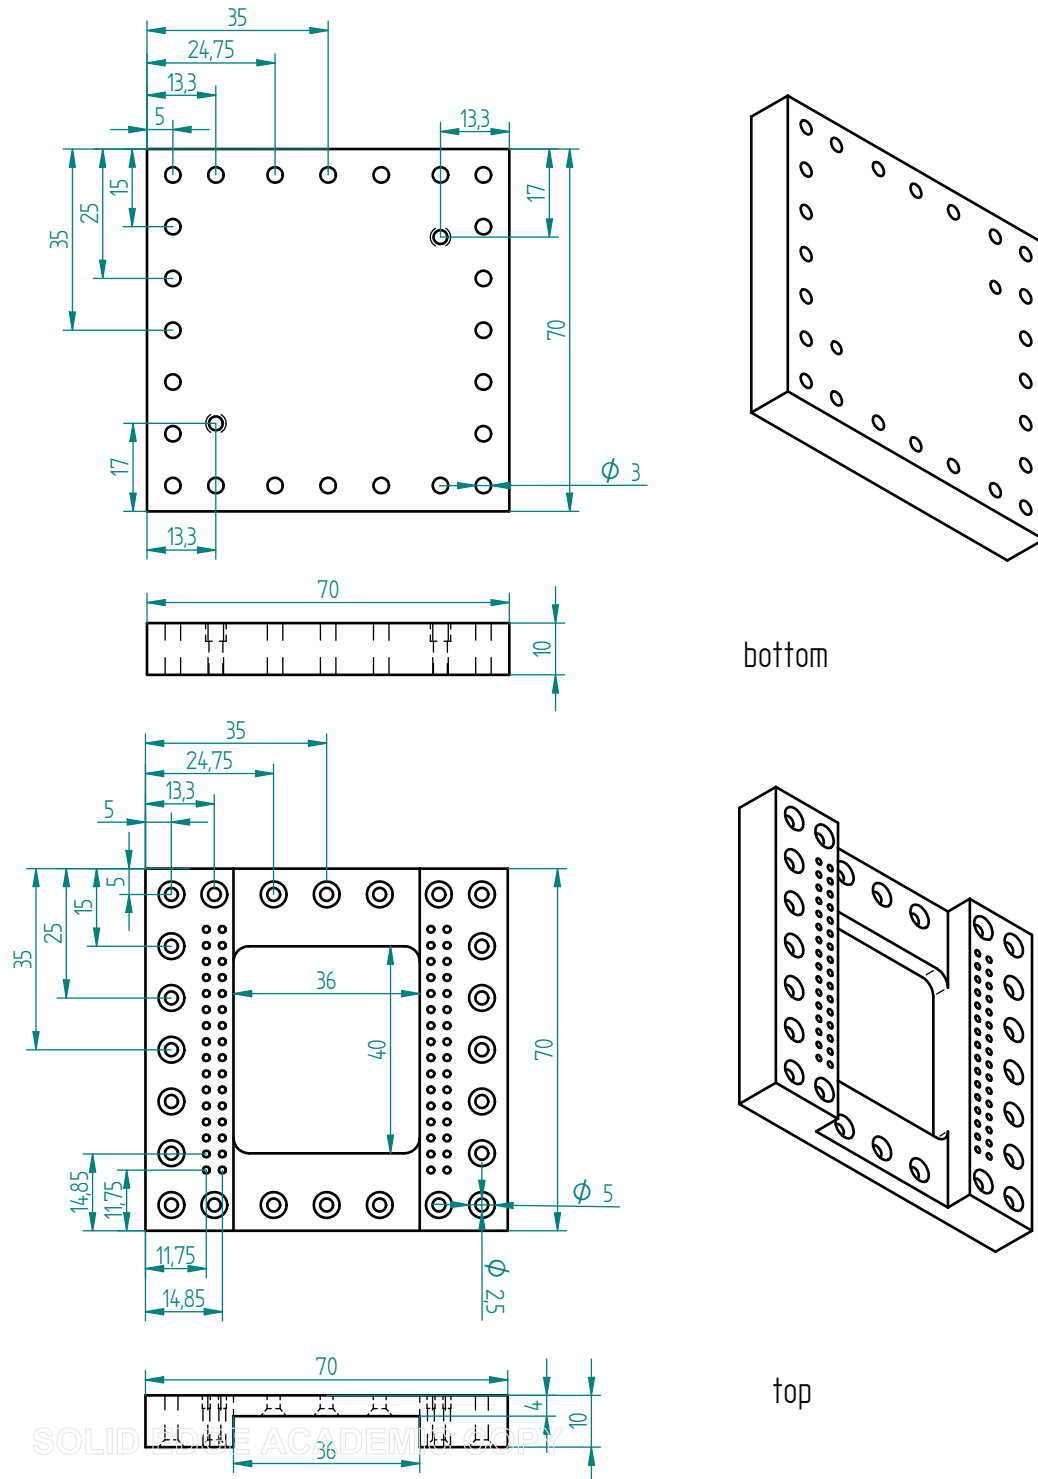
Technical drawing of the silicon device of the third generation with micro-sensors and heater pads.
